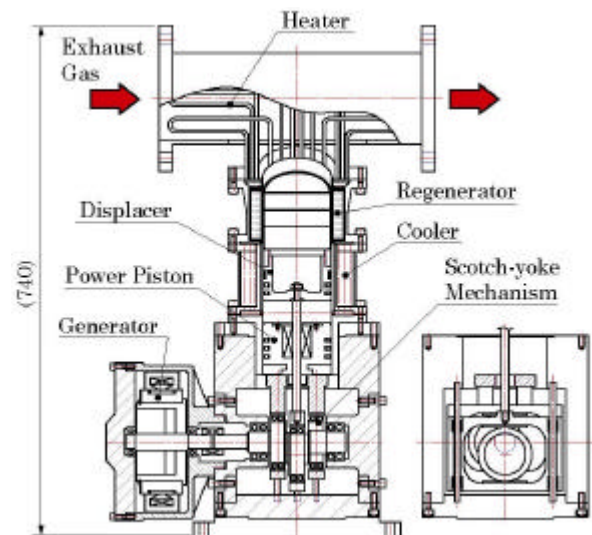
, Concept Drawing of Prototype Stirling Engine (September 2005)
